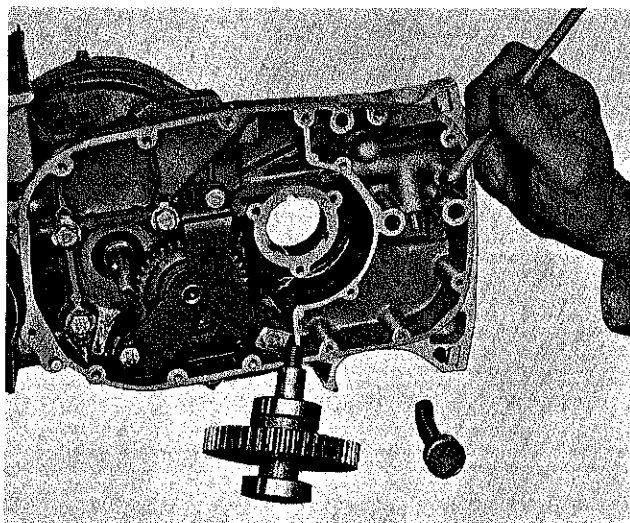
The sprocket shaft assembly may be removed from the gearcase by tapping the end of the shaft with a soft-face hammer. Note the weight assembly removed from the check valve for cleaning. Be sure the check valve is open before reassembly.
